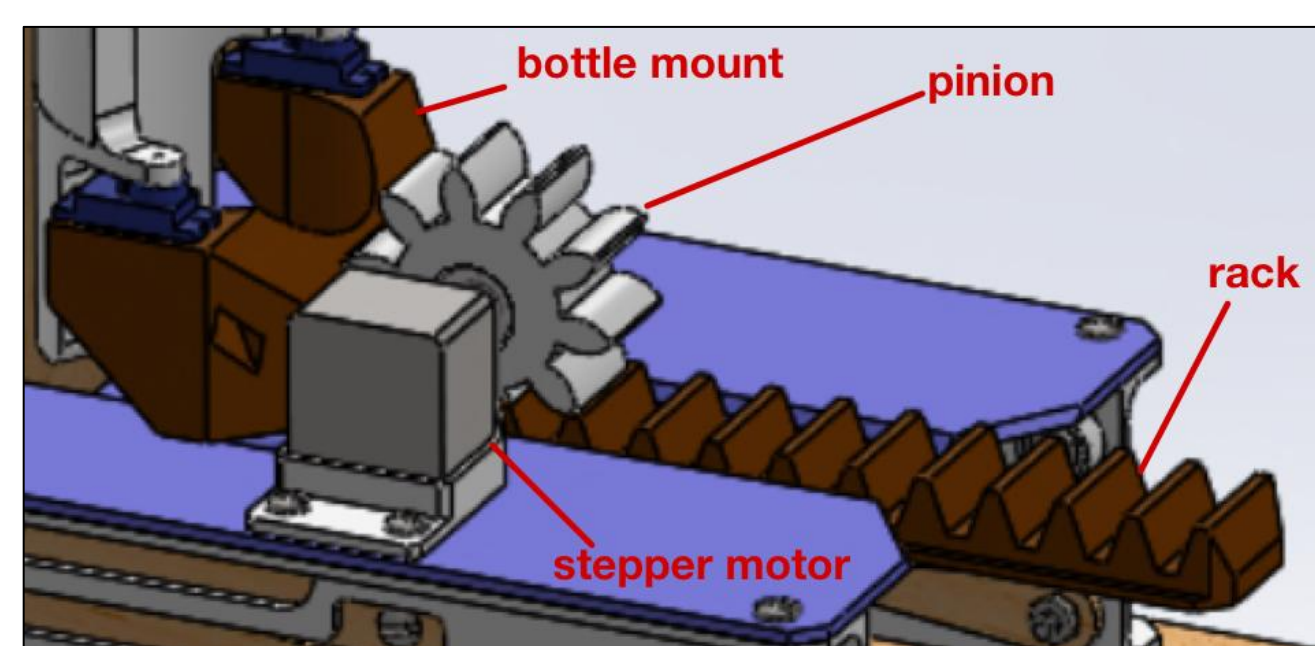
A stepper motor is connected to a pinion via a coupler, and will rotate the pinion. The rotation of the pinion will provide linear motion to the bottle as the rack moves.
